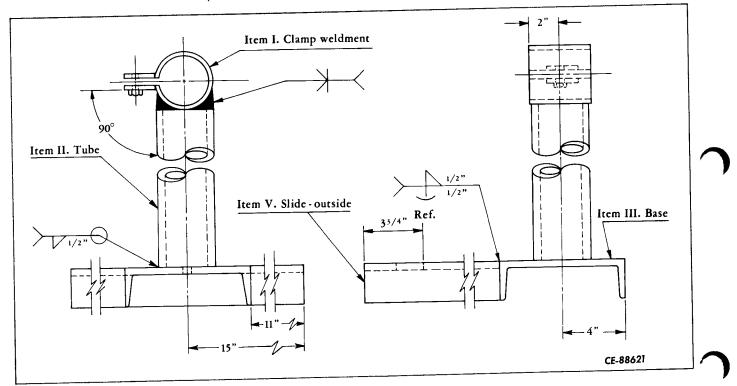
C. Stand Weldment Assembly - Right Hand (1 Required). (Details Shown in Figures 6-86, 6-87, 6-88 and 6-89.) PRINTED IN UNITED STATES OF AMERICA
